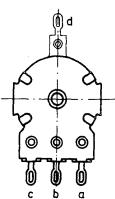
Single potentiometer with mounting bushing. For dimensions d and L, see Spindles.
